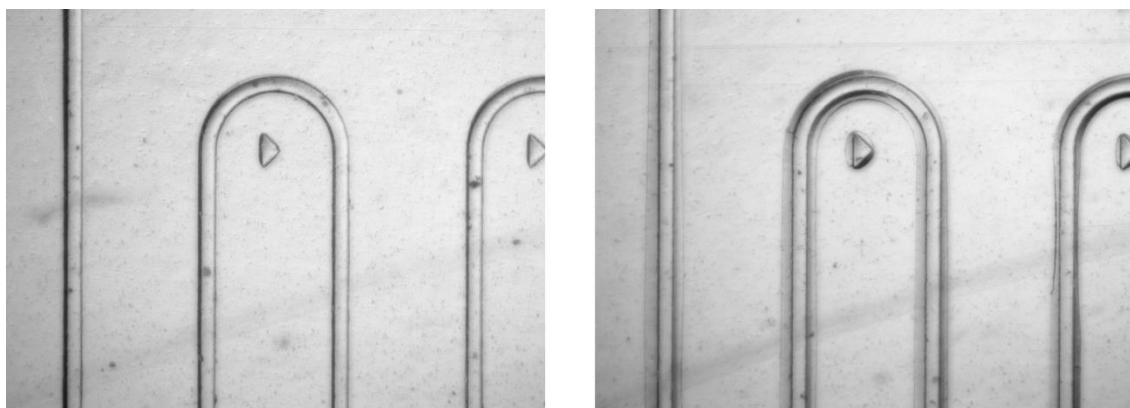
Sample images showing outer channel widths on well-formed (left) and under-formed (right) chips after adhesive tape has been applied.
